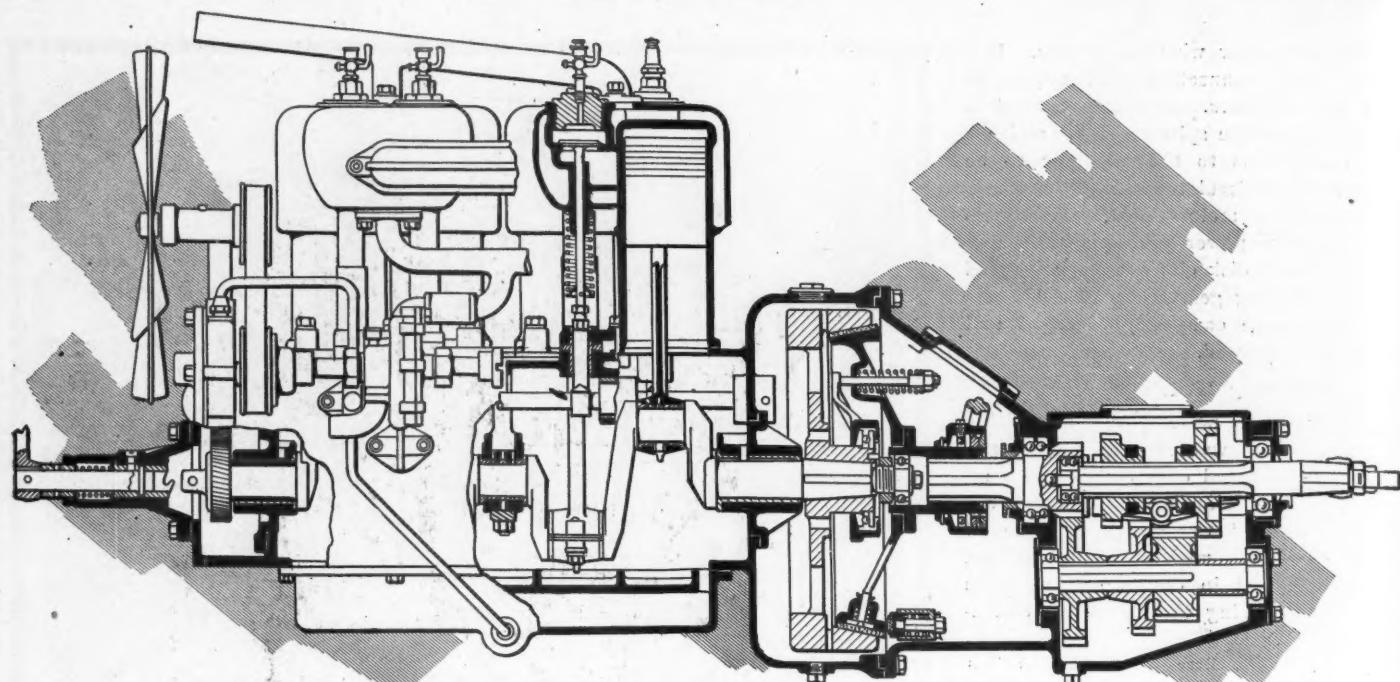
SHOWING CONSTRUCTION AND DETAILS OF WARNER UNIT POWER PLANT
